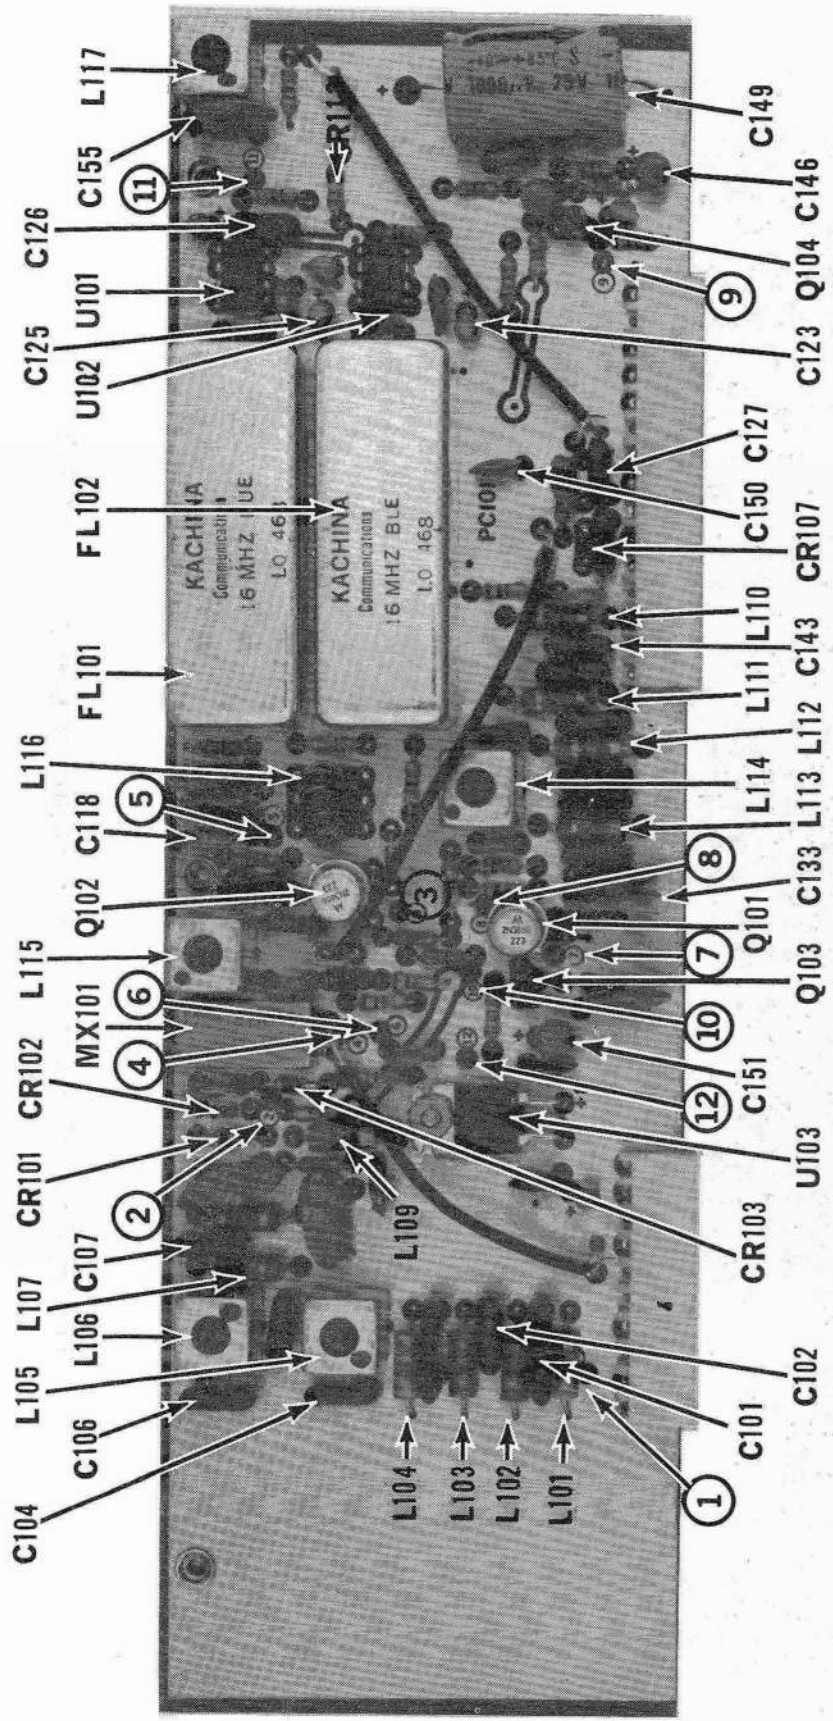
PHOTOGRAPH, PC101, SHOWING COMPONENT LOCATIONS
